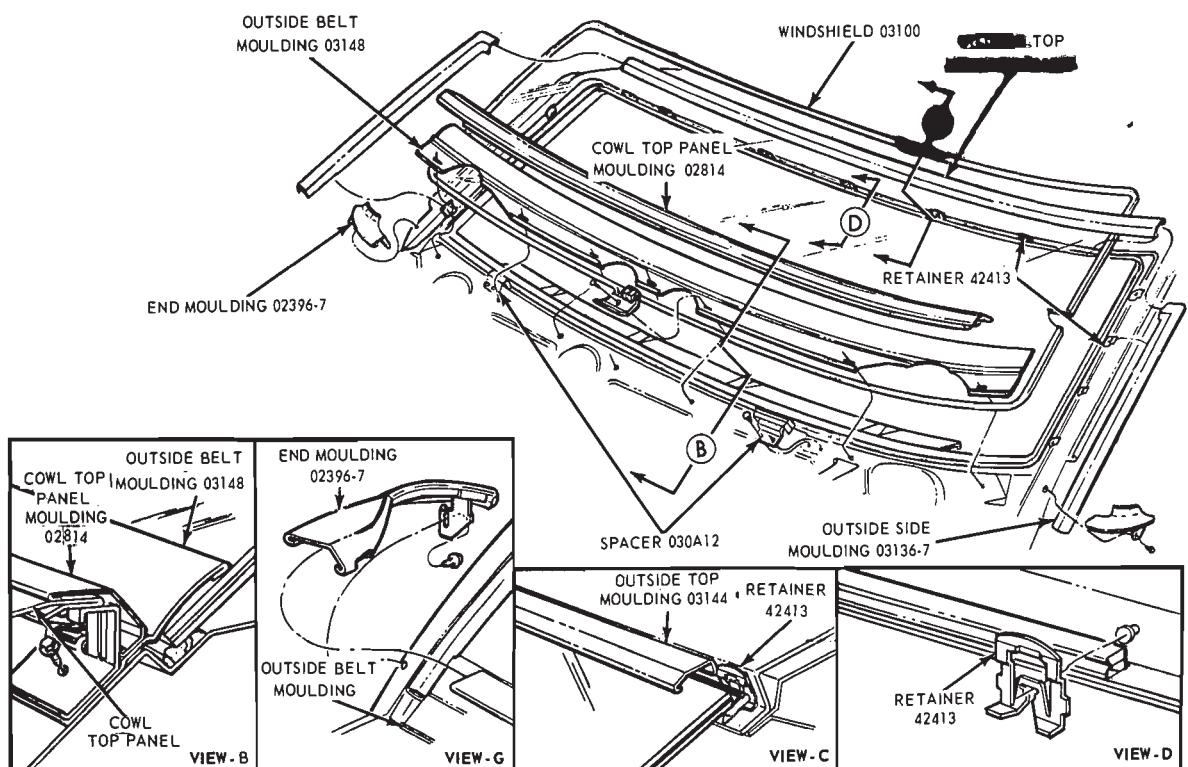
Windshield Mouldings Installation—Ford, Mercury and Meteor Except Model 76
